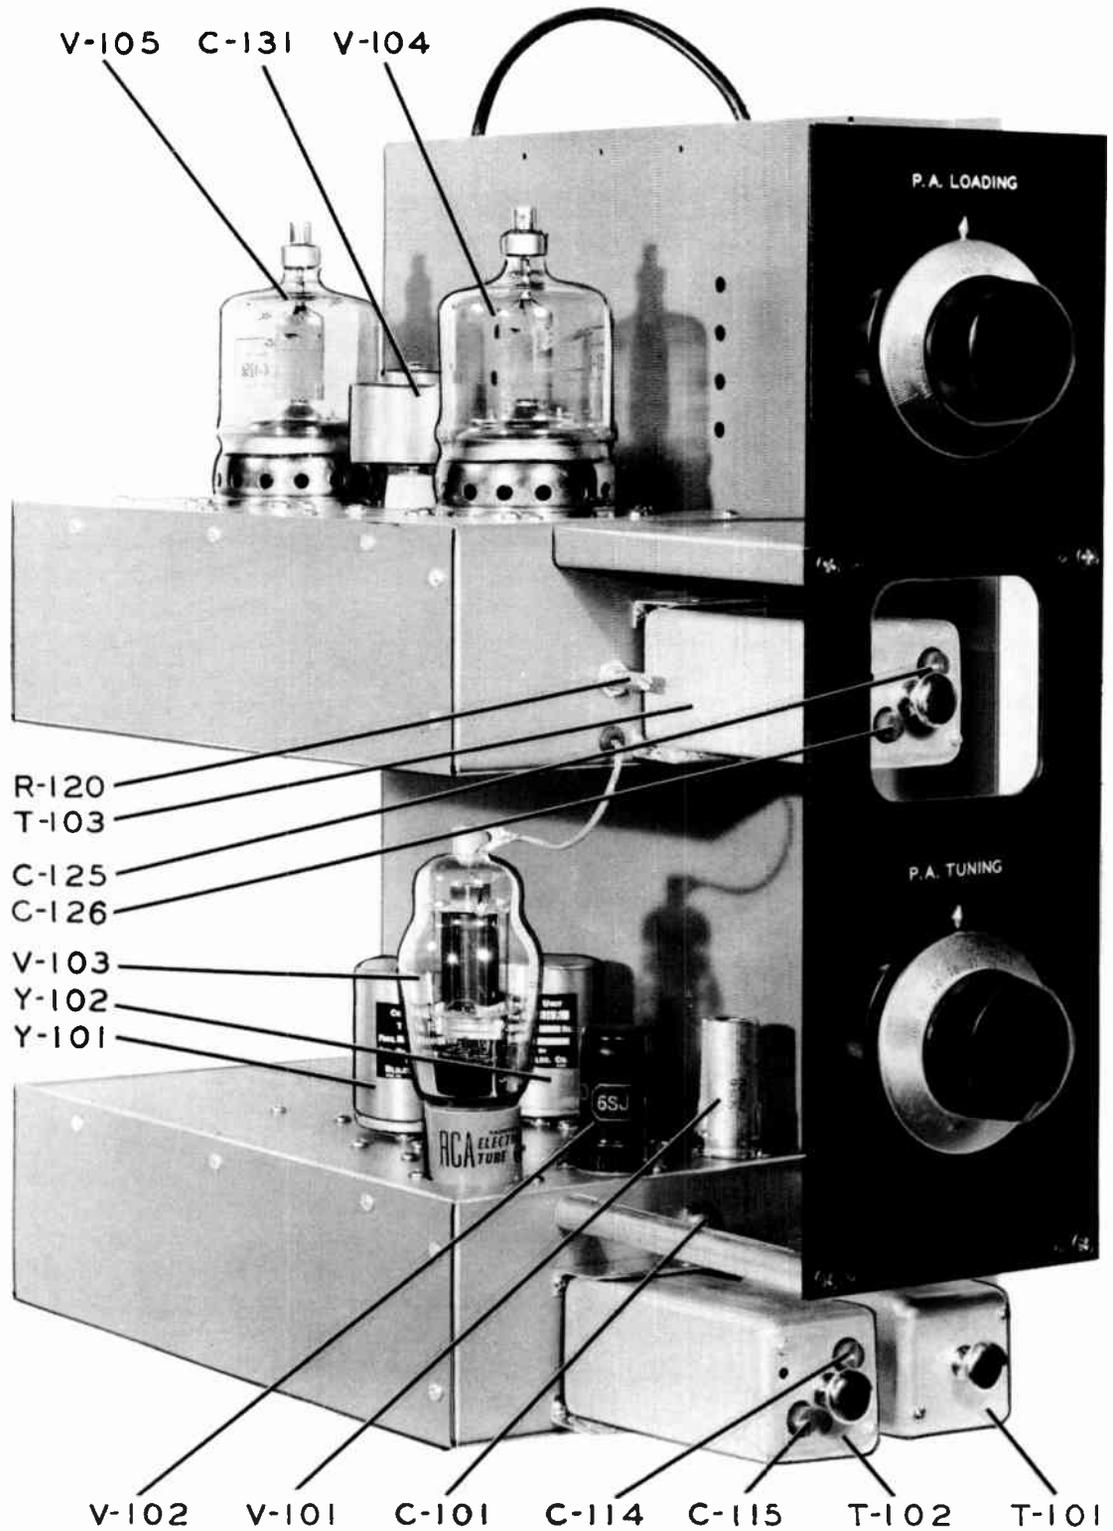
Driver Cabinet RF Chassis, Top View.
